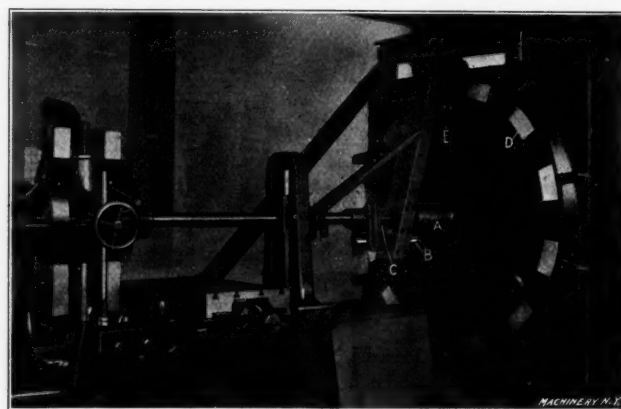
Universal Chuck for Holding Center Drill, and Stop for Drill Feed
